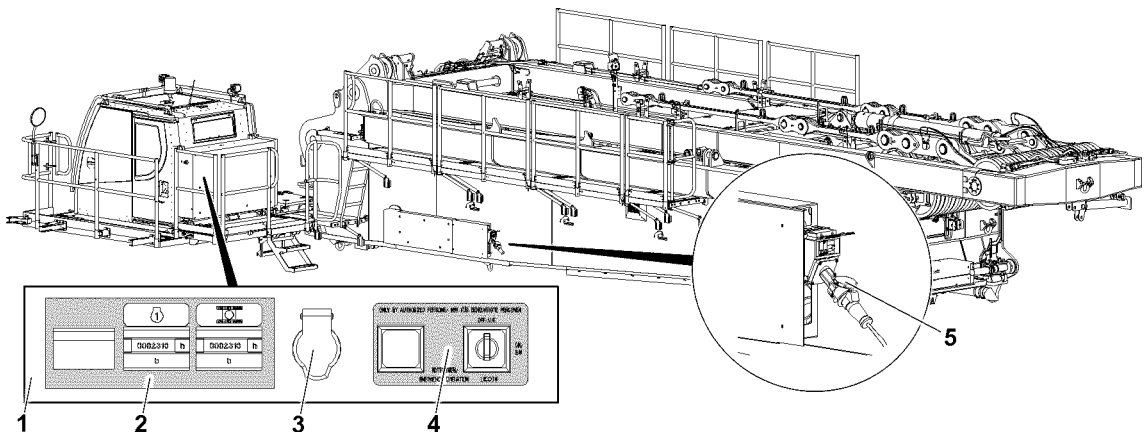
Control cabinet panel and control unit operating element external power supply assignment
